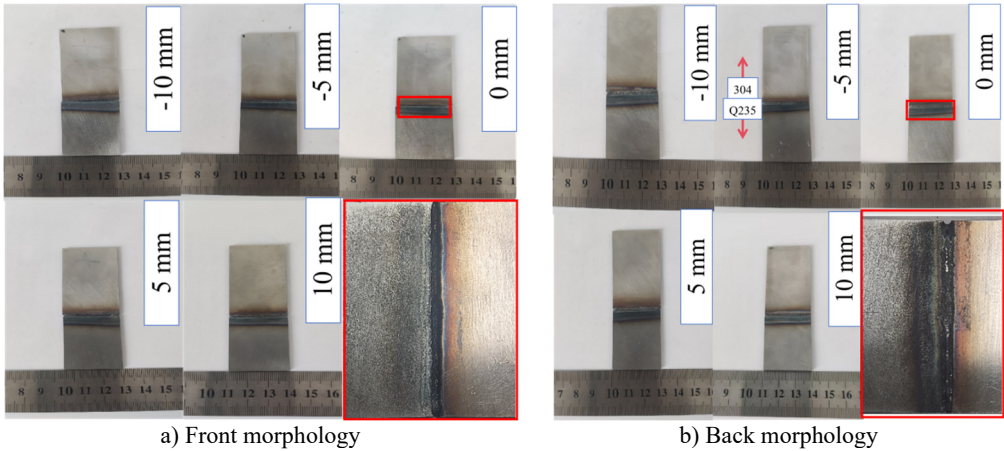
Macroscopic morphology of Q235/304 welded joints.
